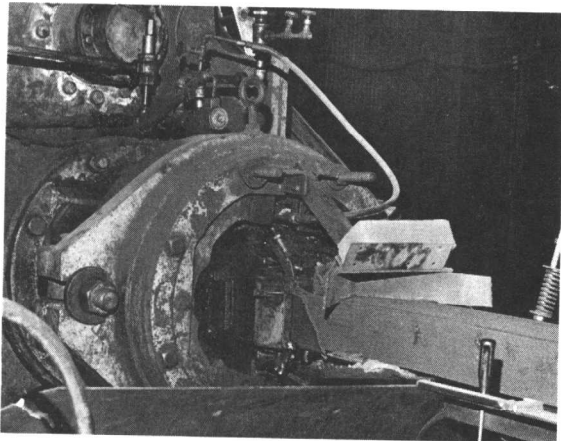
A pug mill showing the column of brick after being forced through the die
